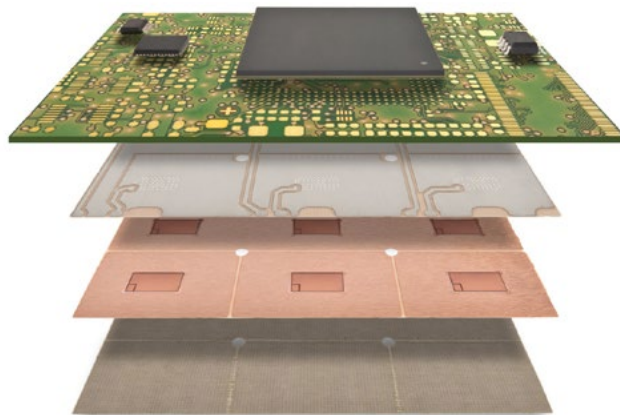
Exploded drawing of the Smart p² Pack functional layers.
